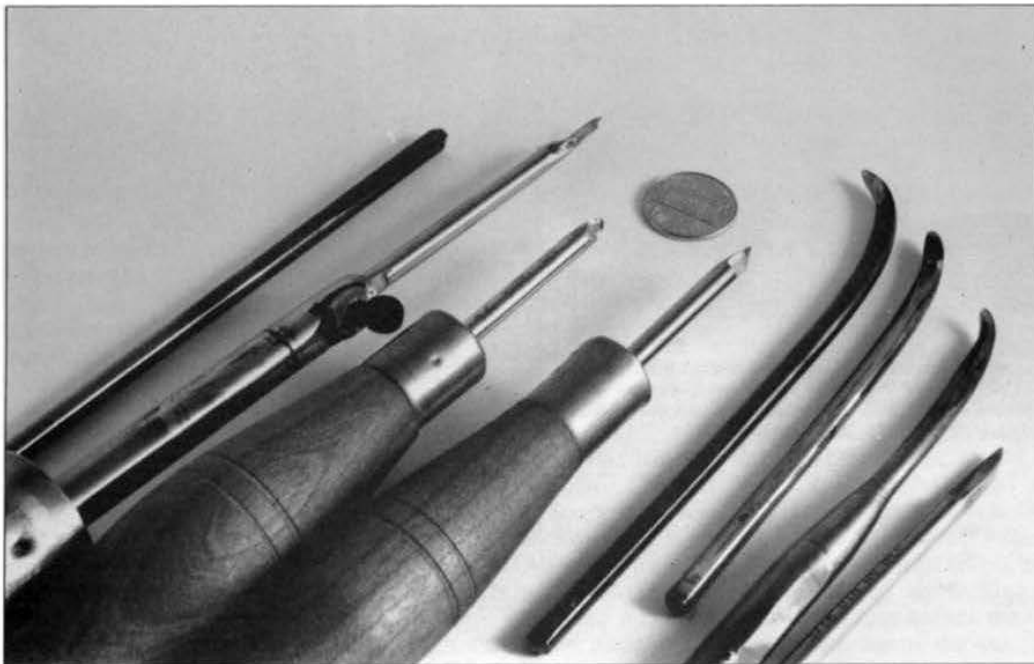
l. to r., small deep-fluted gouge made from 3/16" drill rod; 1/32" parting tool in holder made from 3/16" drill blank; 3/16" round scraper, made from 3/16" drill blank; pointed scraper made from 3/16" drill blank; three curved tools to hollow out vessels, made from drill rod; round-sided scraper, made from 3/16" drill blank
